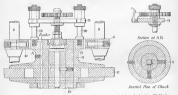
The Benton-Waldo machine; detail of sliding head and chuck. Half size.
